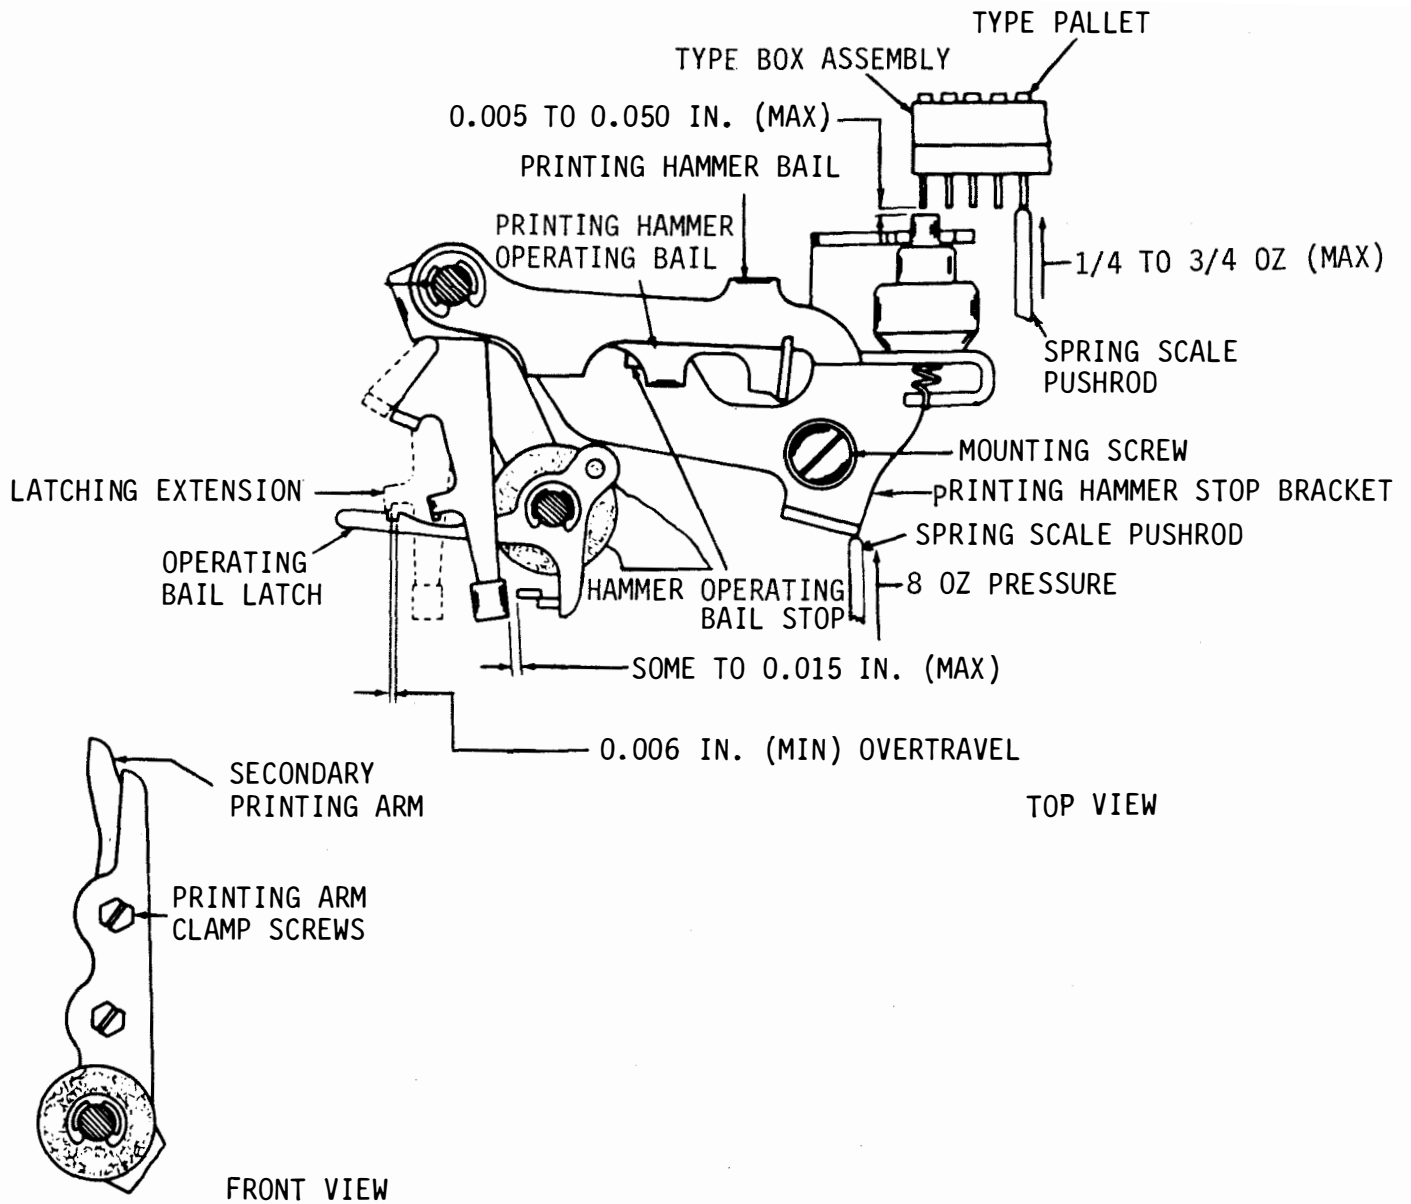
Printing Hammer Stop Bracket, Type Pallet Spring, and Printing Arm
